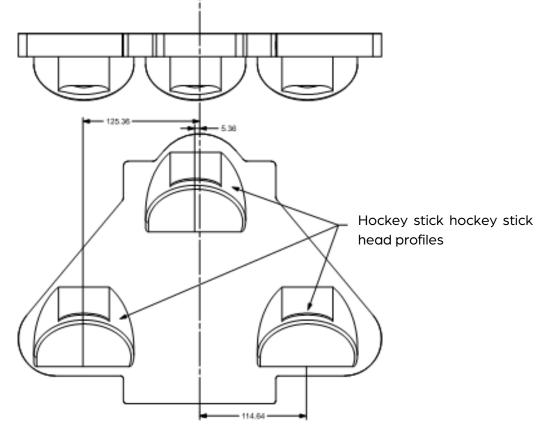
mounting of three stick profiles on sledge (dimensions in mm)
